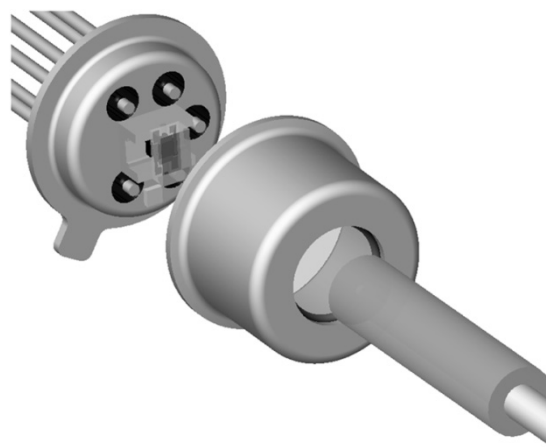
Design for packaged optical channel monitor or tunable detector, showing the filter chip incorporating heater film, chip carrier, header, TO can and fiber pigtail. Detector sits below the chip.
